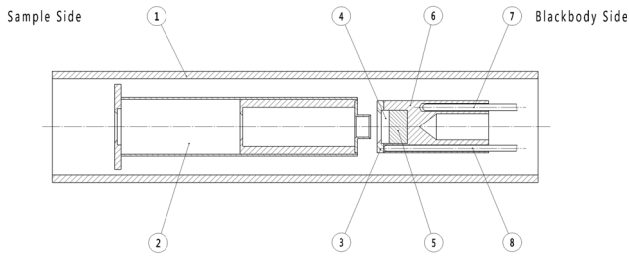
Cross-sectional diagram of the furnace ceramic tube (top view). Ceramic tube (1), radiation shield (2), sample locking ring (3), sample (4), adjusting block (5), sample-blackbody housing (6), cavity thermocouple, TC Direct 405-038-Class 1 (7), and sample thermocouple, TC Direct 405-038-Class 1 (8).
